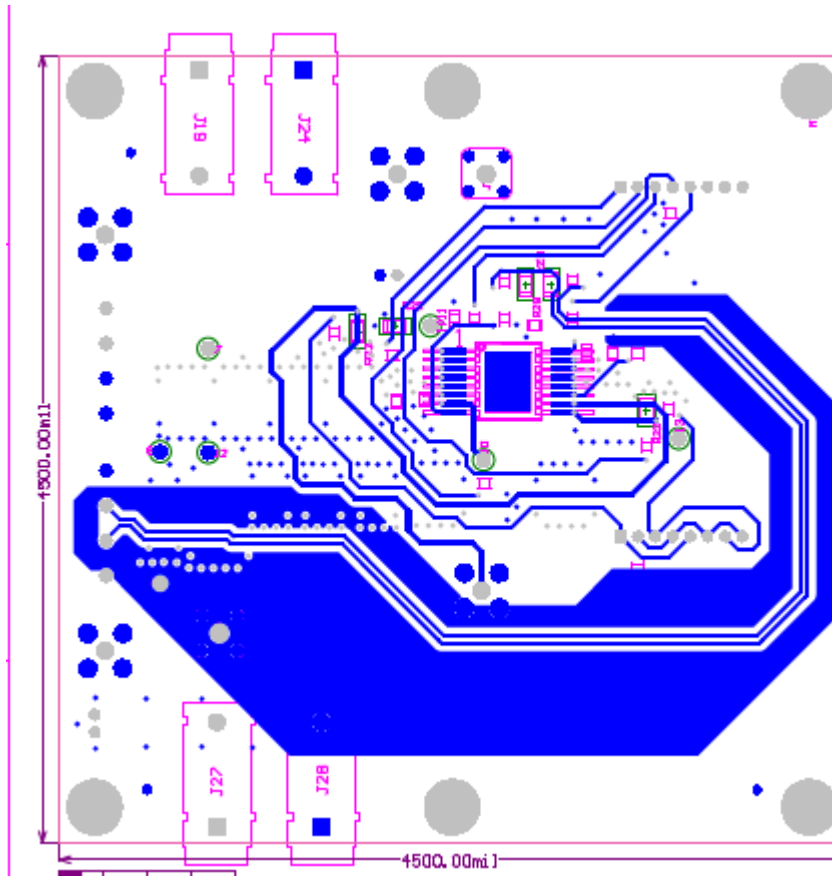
Board Layout - Fourth Layer (Bottom Layer)
